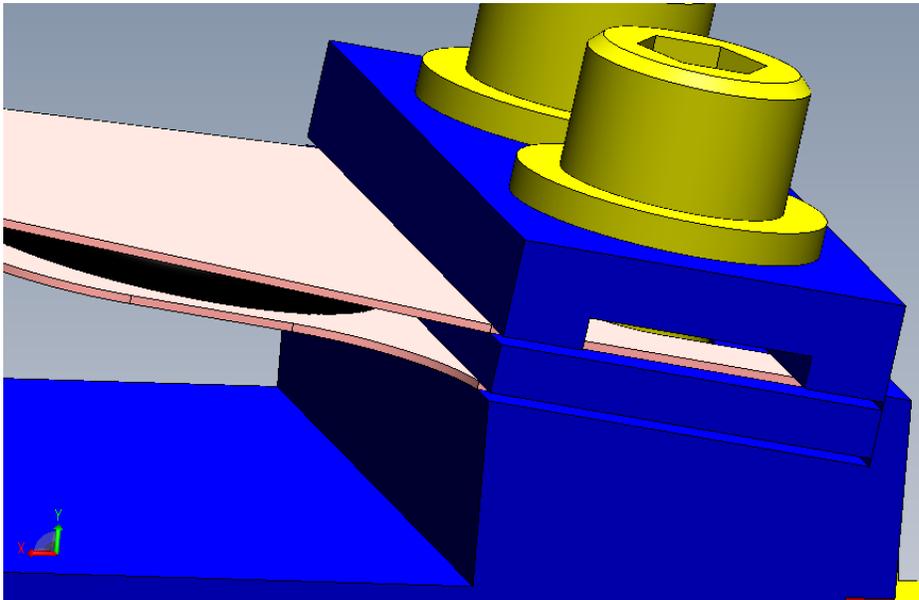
Details of the Ledge, Spacer, Blade and Clamp onto the step on the Pitch Adjuster.
